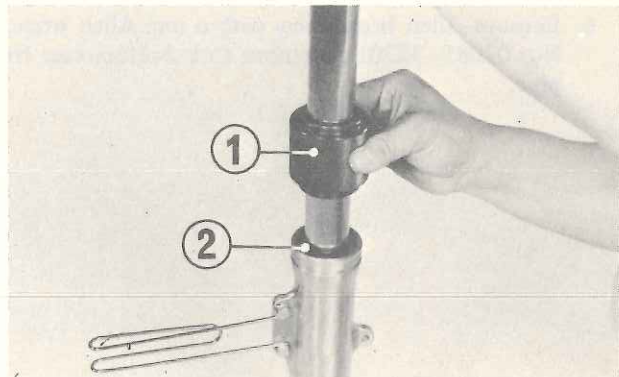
(1) Fork seal driver (2) Fork seal
